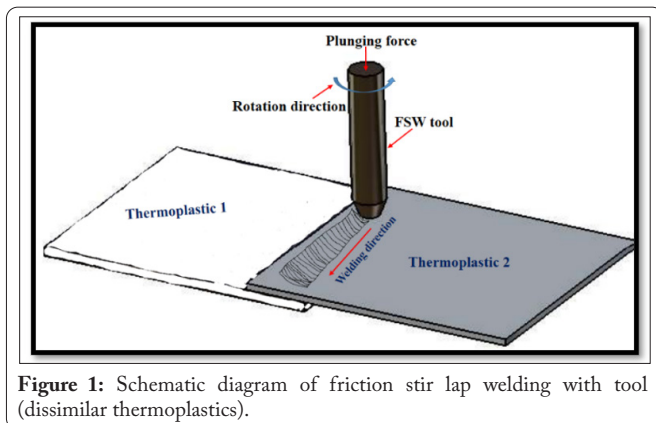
Schematic diagram of friction stir lap welding with tool (dissimilar thermoplastics).
